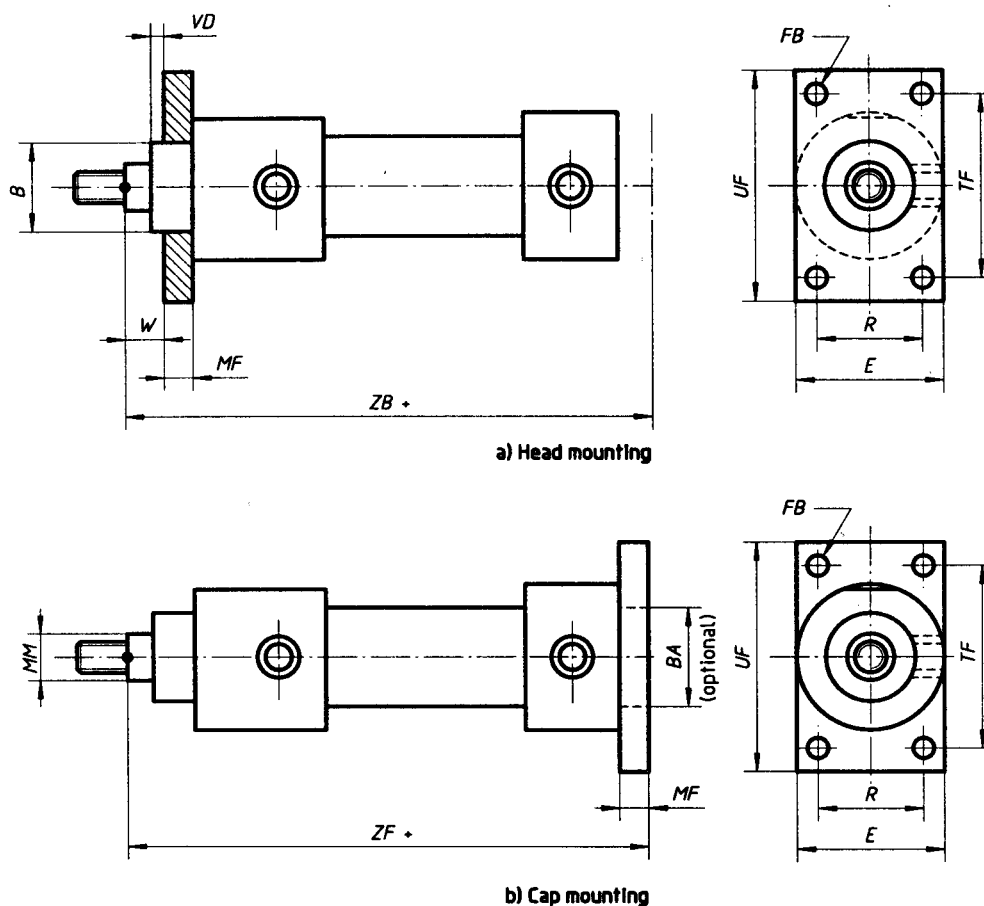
MF1 — Head rectangular flange mounting and MF2 — Cap rectangular flange mounting
